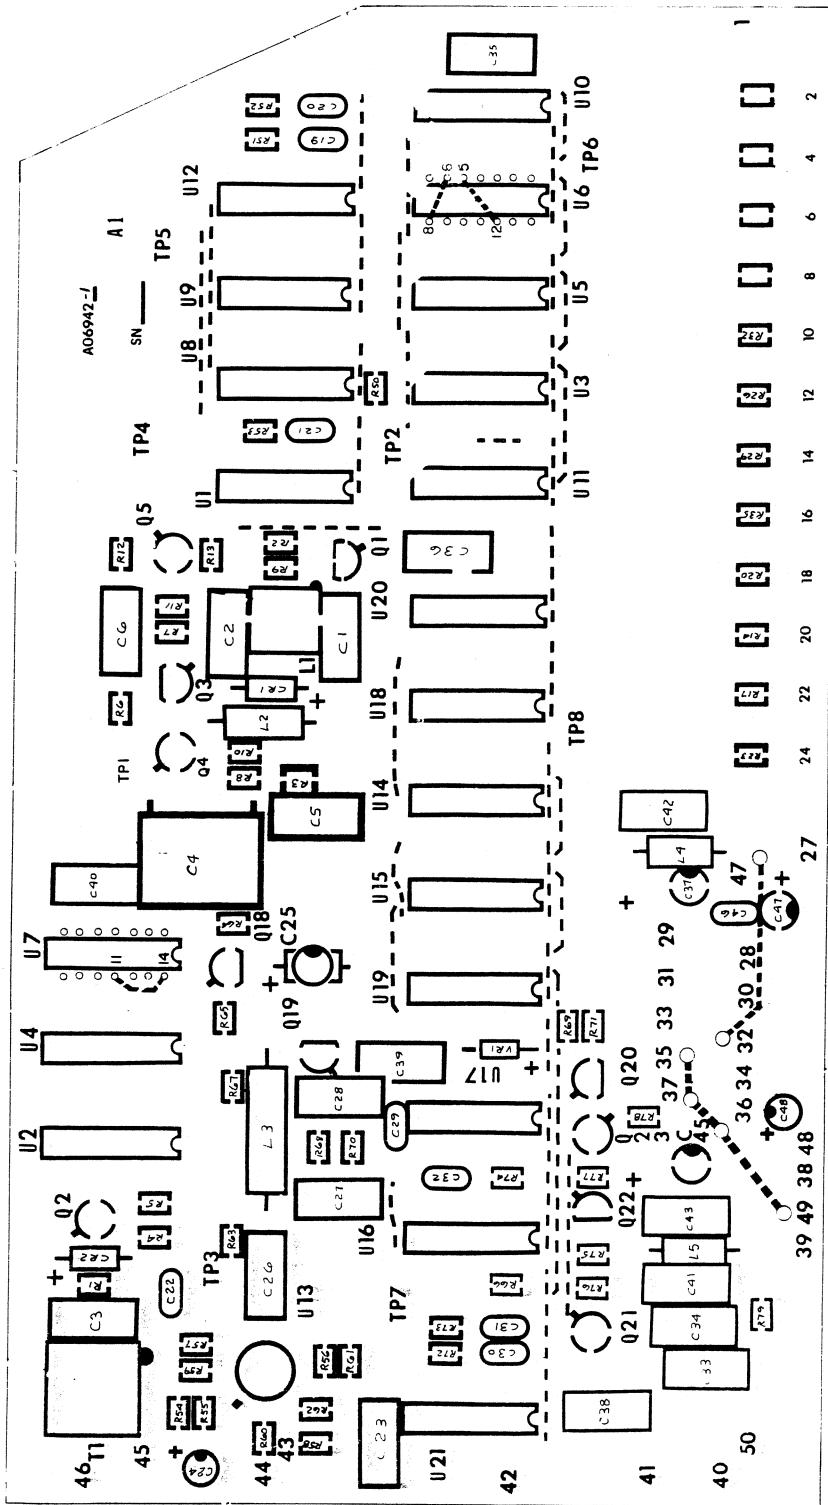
B. Lower Loop BFO Synthesizer, A23A1, Circuit Card Assembly
